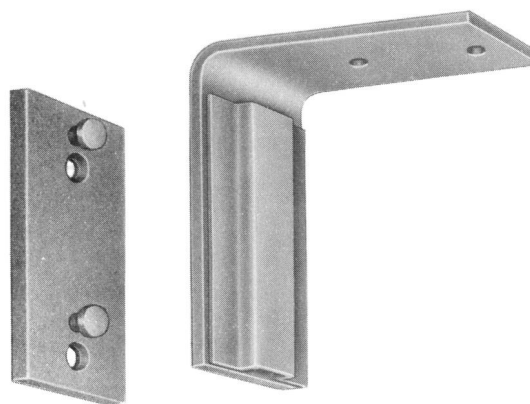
KS-16422, List 4 Mounting Bracket Assembly
